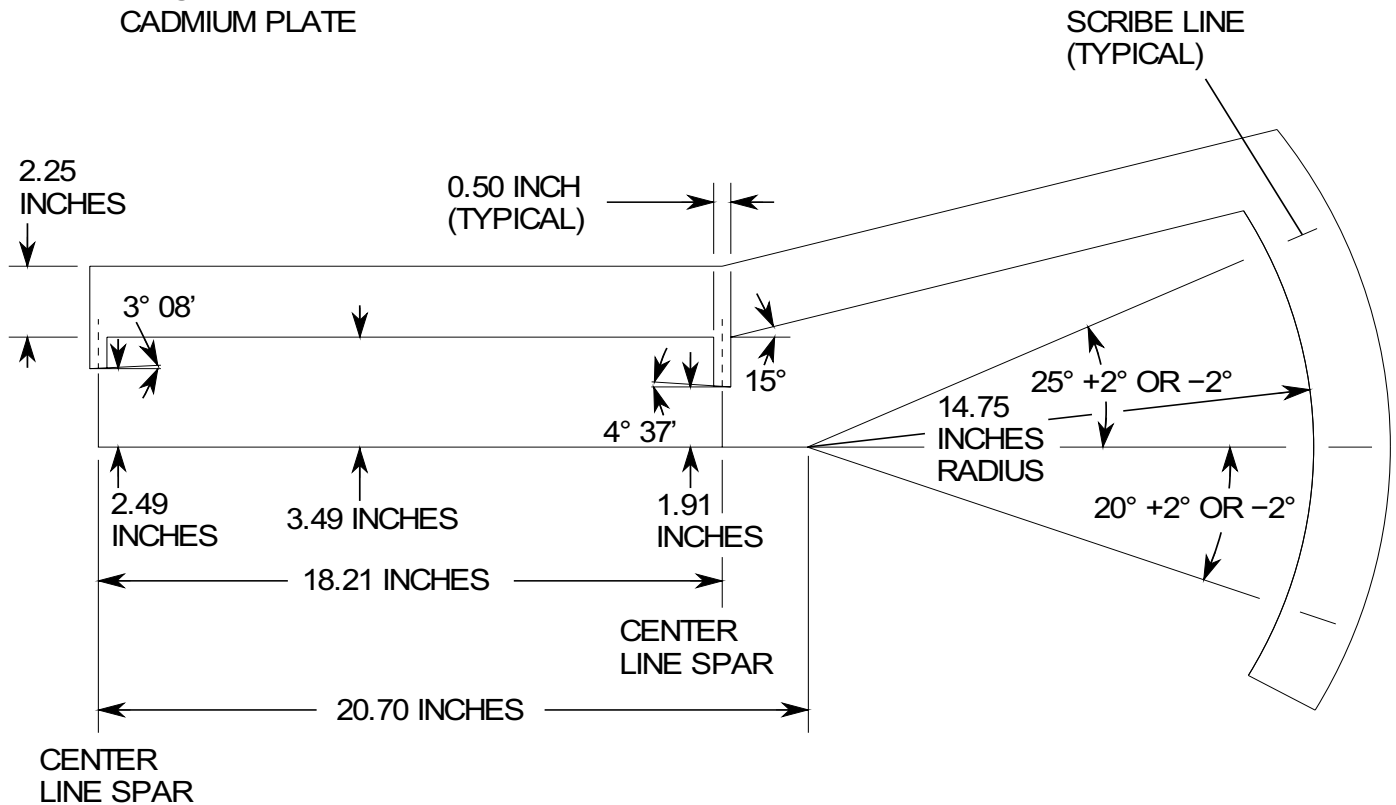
Sheet 1 : Rigging Tools Fabrication
